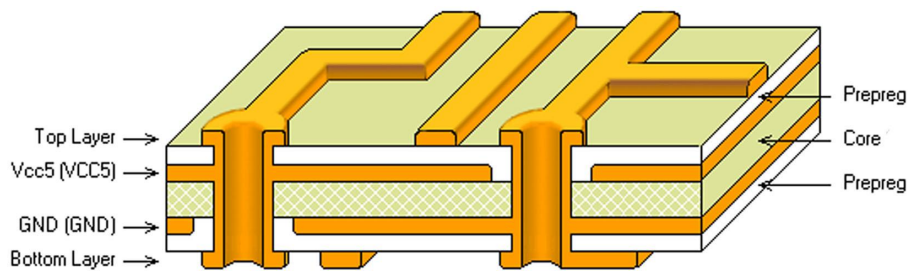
Side view of a 4-layer PCB constructed at TraX.
